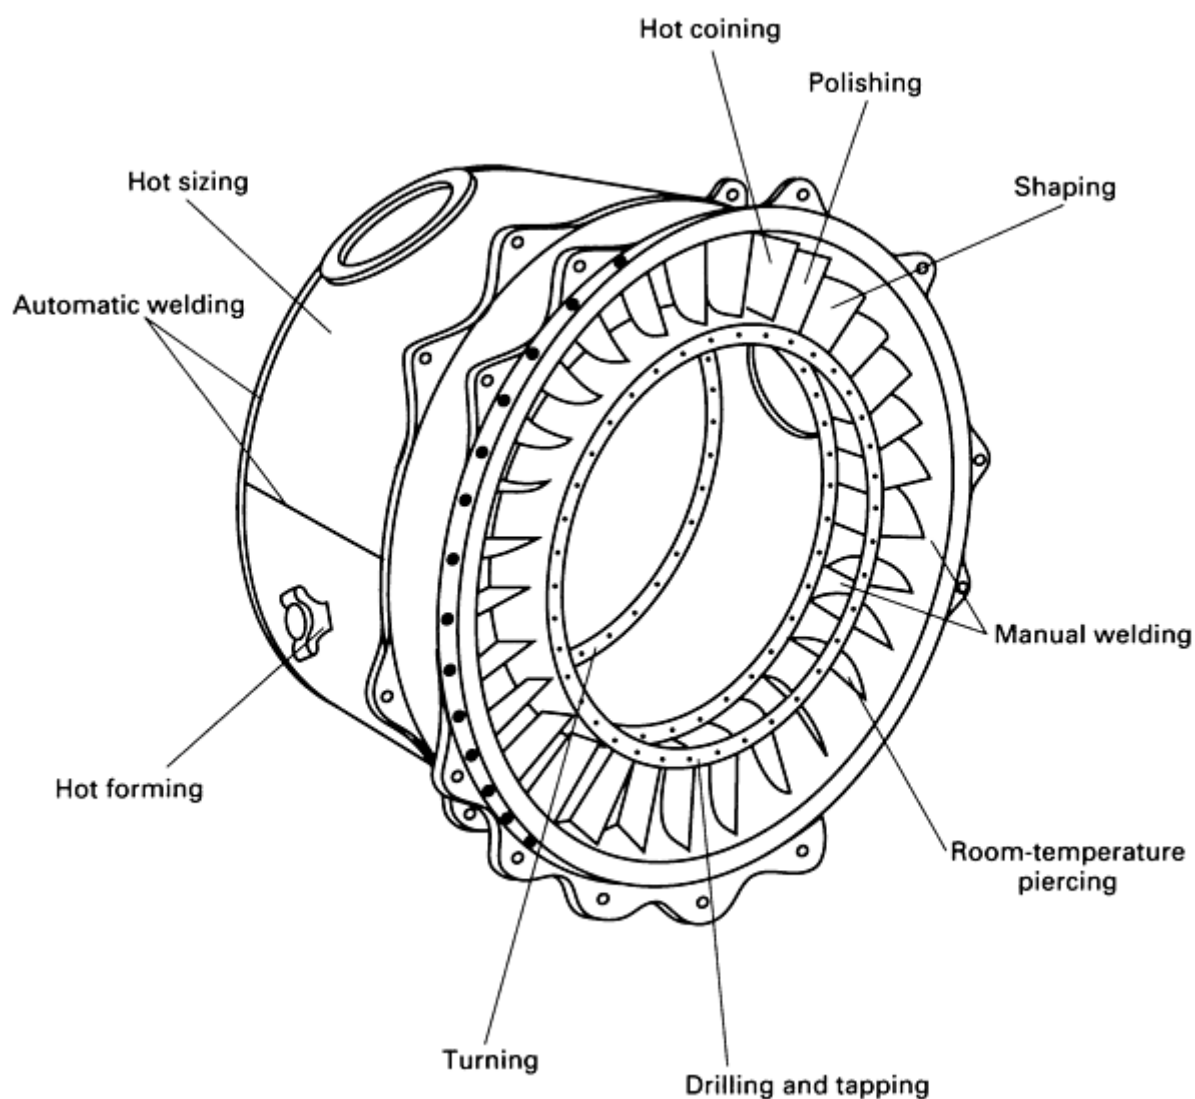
Turbojet compressor case, showing fabrication processes employed in its manufacture
